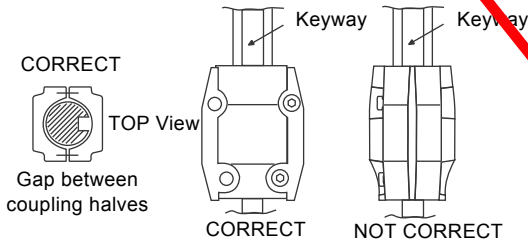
Coupling adjustment all CR, CRI, CRN, CRT
